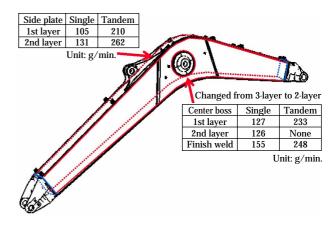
Tandem Welding Adapted Weld Line
